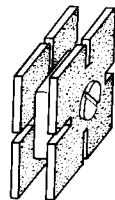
Shape of coil after it is flattened to obtain coil dimensions.
